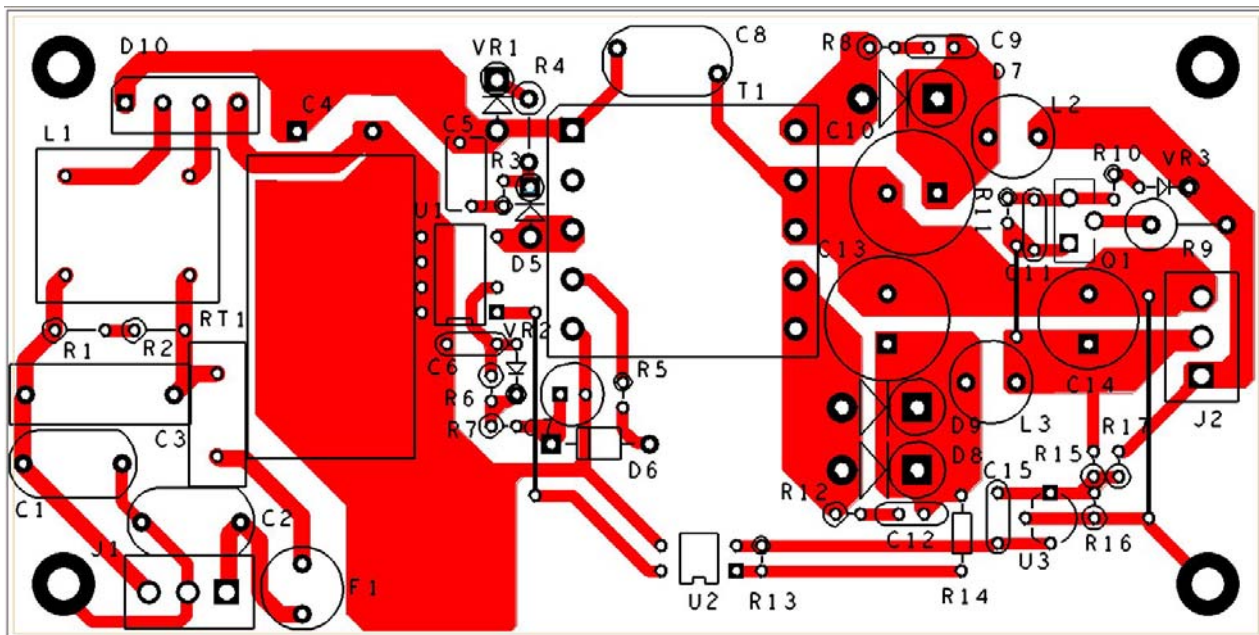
PCB Layout (5 x 2.5 inches / 127 x 63.5 mm).
